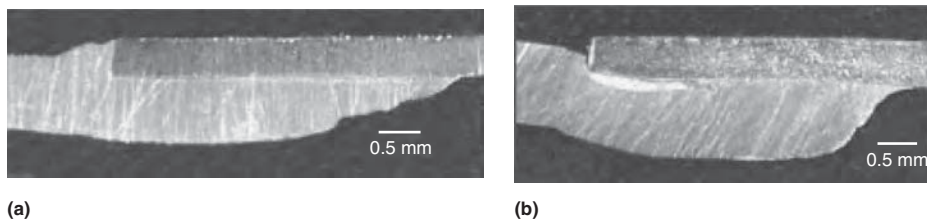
Macrostructure samples from joints after laser roll welding of low-carbon steel sheet (JIS-SPCC) with (a) A1050 aluminum and (b) aluminum-magnesium alloy A5052. Laser power, welding speed, and roll pressure were: (a) 1.5 kW, 1.5 m/min (4.9 ft/min), and 150 MPa (22 ksi) for A1050, and (b) 1.5 kW, 2.2 m/min (7.2 ft/min), and 200 MPa (29 ksi) for A5052
